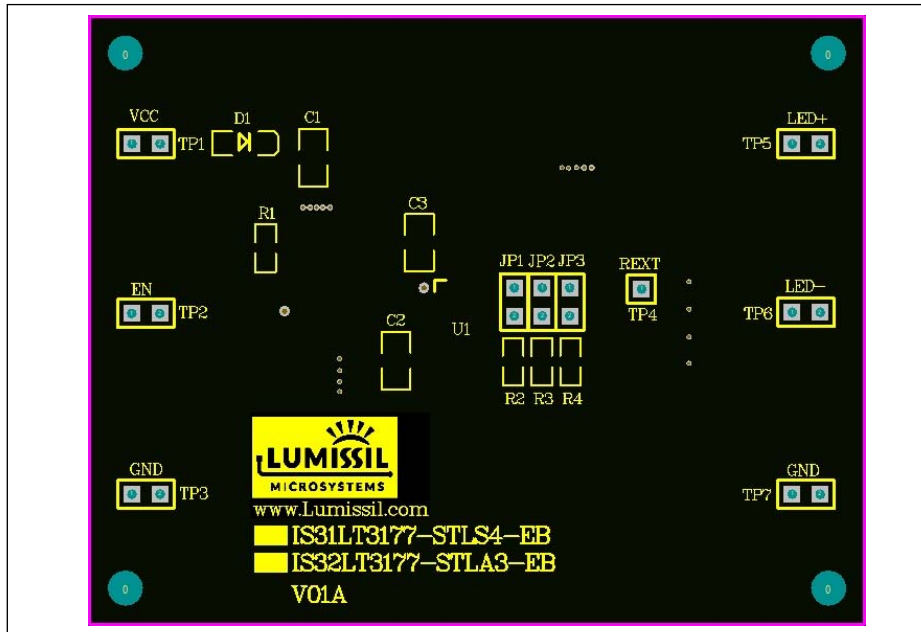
Board Component Placement Guide - Top Layer (SOT23-6)
